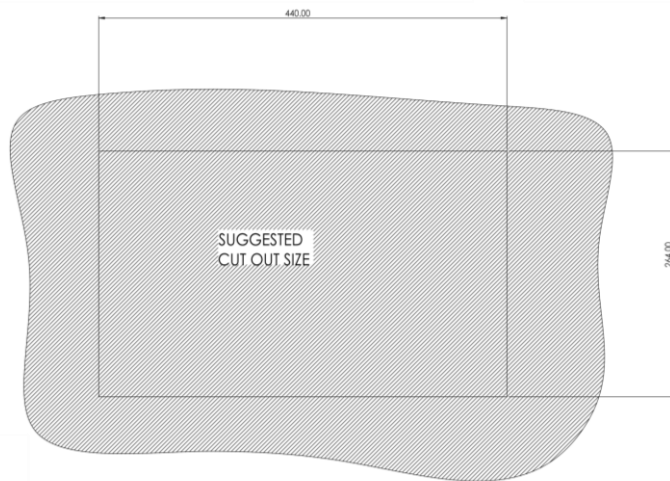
AURA-W185-RK3576 Panel Cutout Dimensions
